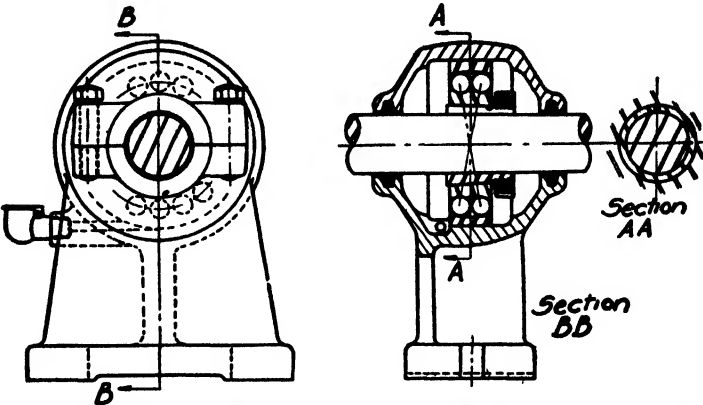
Adapter-type Double-row Ball Bearing and Pillow Block.
